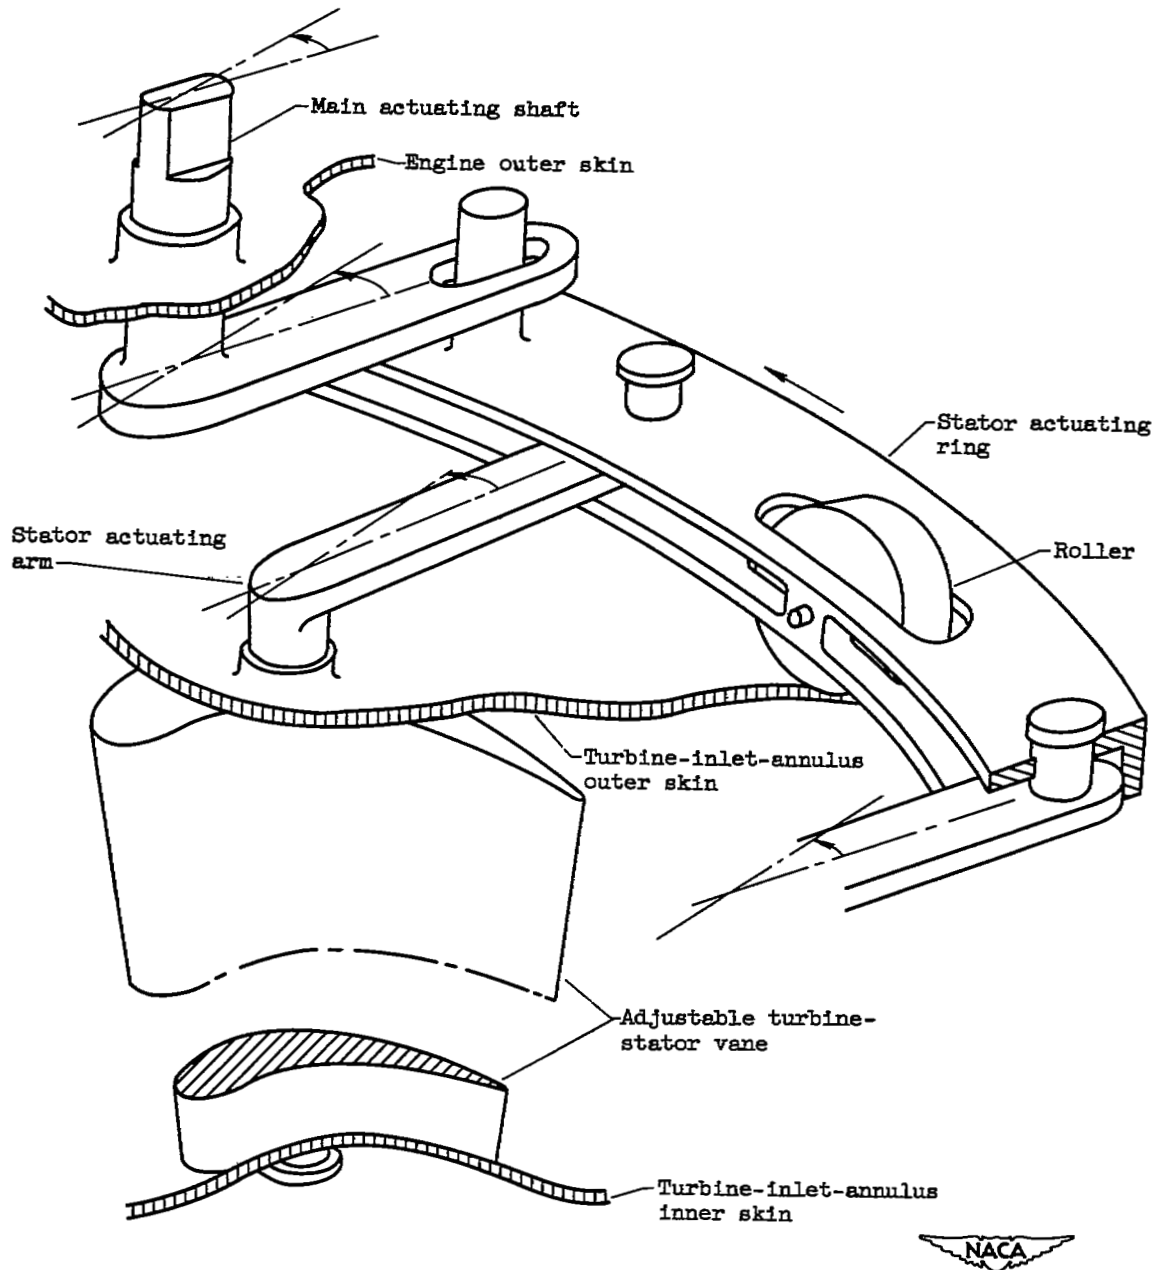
Schematic sketch of adjustable turbine-stator actuating mechanism.
